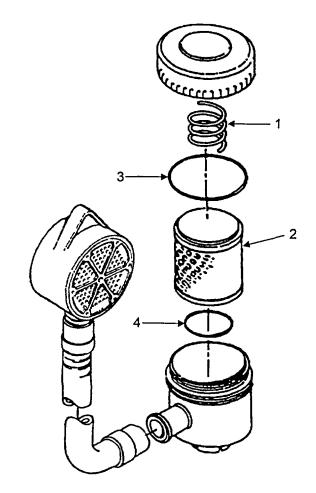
COMPRESSOR INTAKE AIR CLEANER FILTER
